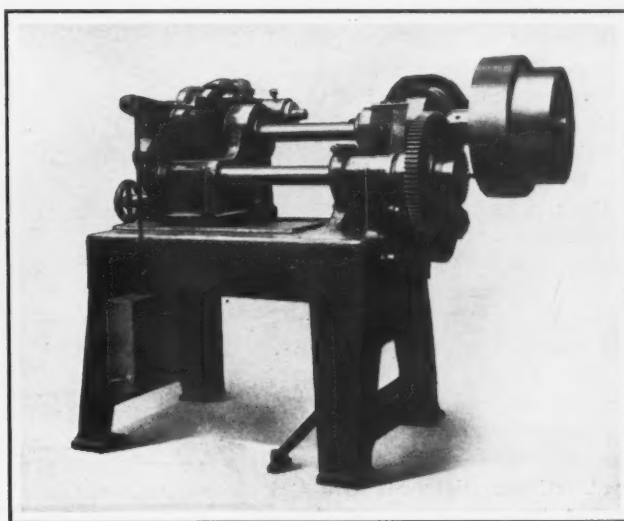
Rear View of the Machine illustrated in Fig. 1
